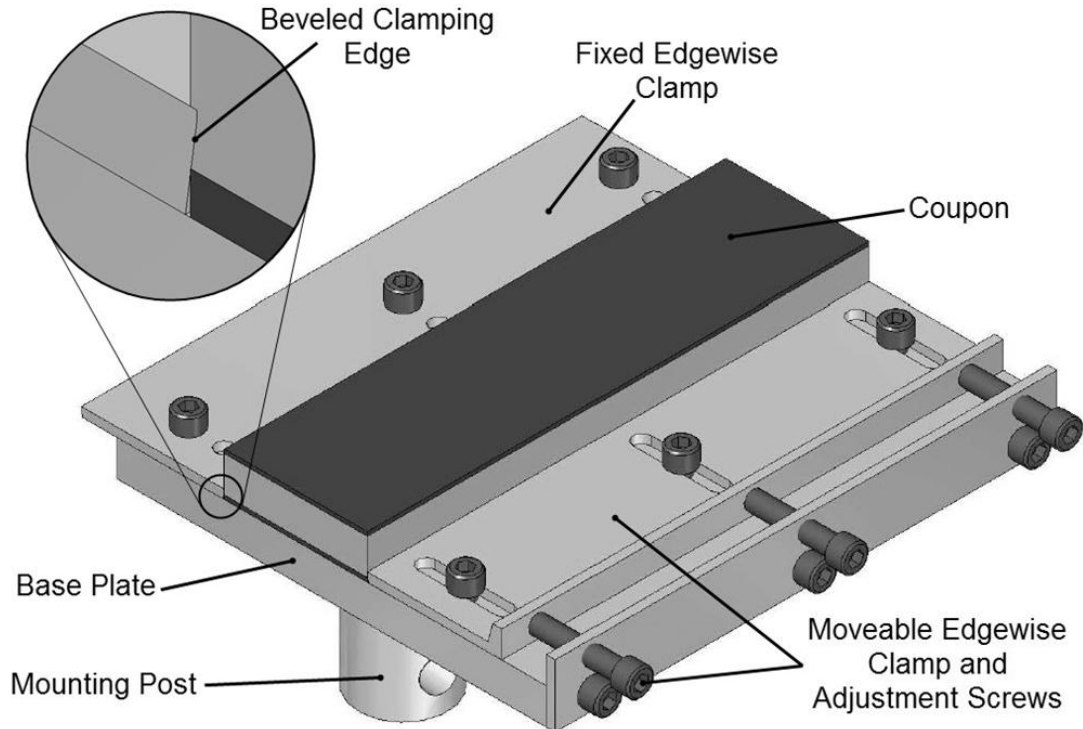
Test fixture and coupon showing edgewise clamping mechanism
